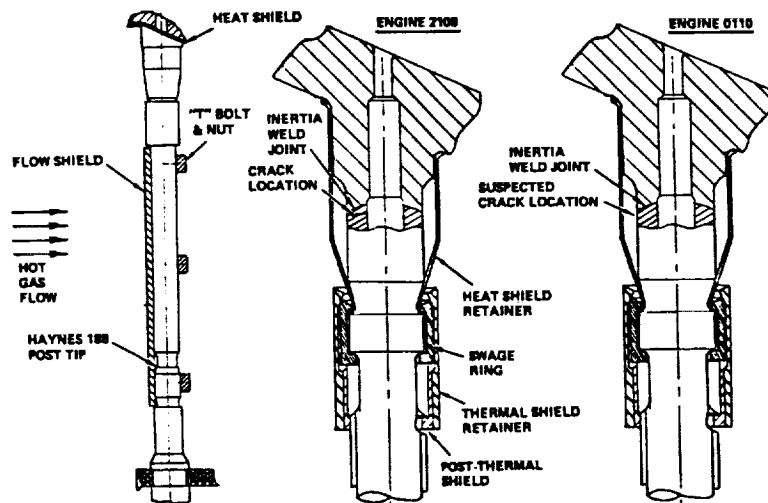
Inertia Weld Cracks for Engines 2108 and 0110
